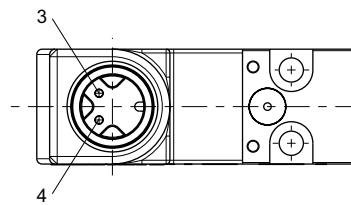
Filling unit with pilot valve and electrical connector for plug M12x1
